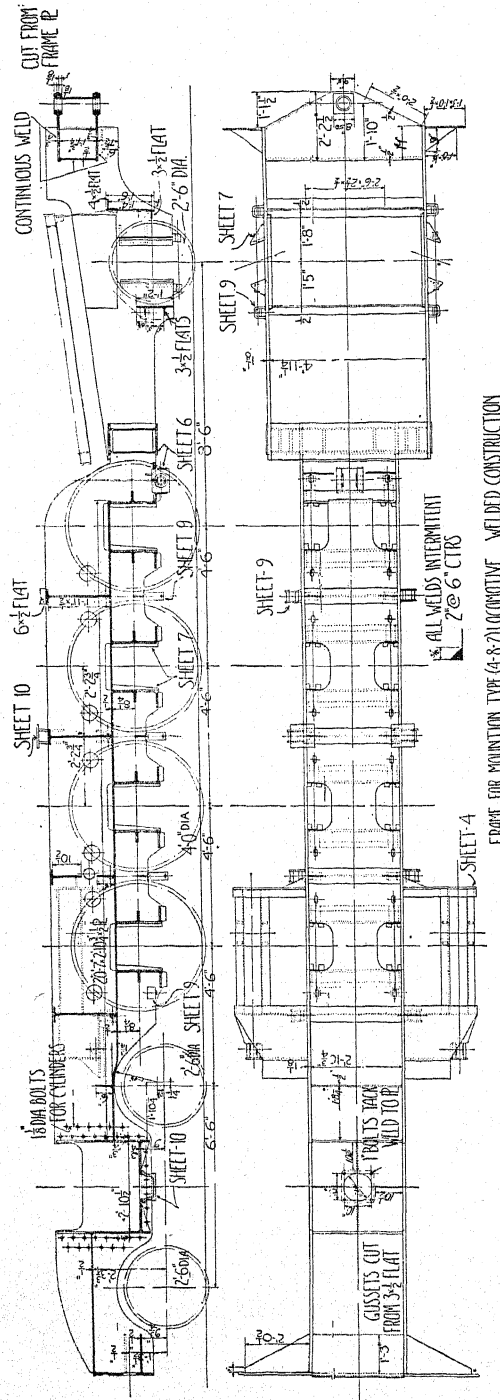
General arrangement of locomotive frame for welded construction.
